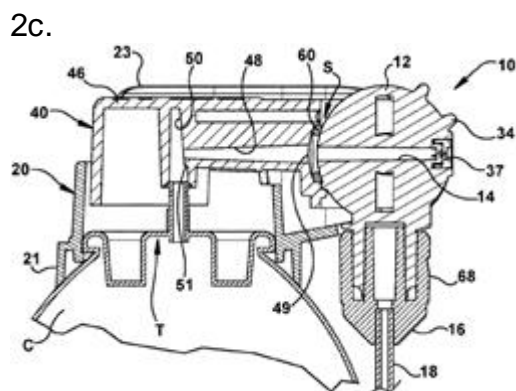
illustrates an expanded view of a rotatable valve assembly (12) enabling outlets (37) and (18) to be brought selectively into fluid communication with a passage (48).
